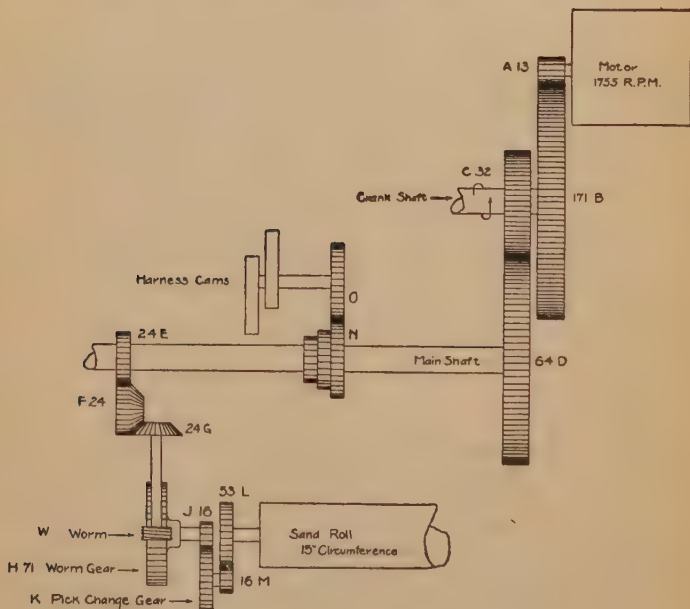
TAKE-UP GEARING OF A LOOM WITH A SINGLE WORM TAKE-UP
